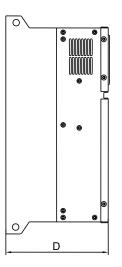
External and mounting dimensions (CT3000 PRO: 355kW to 800kW)
